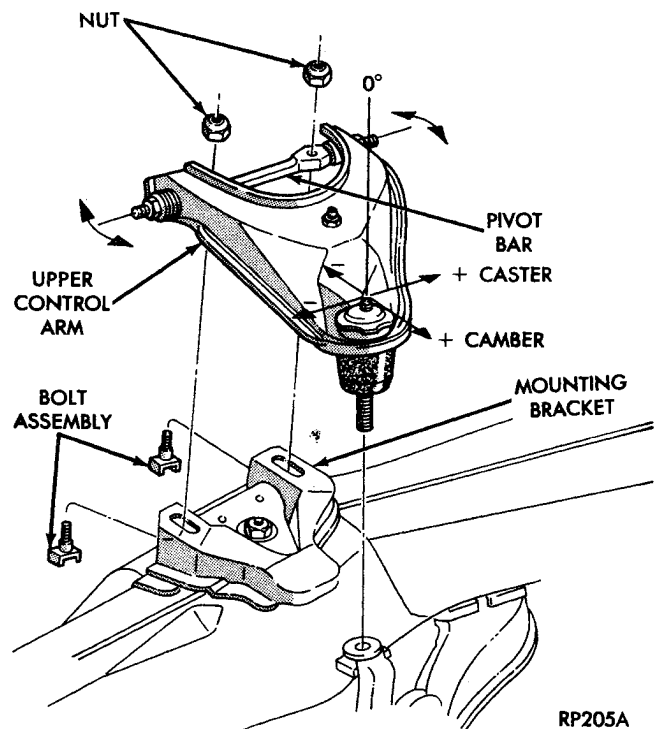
Upper Control Arm Mounting— for Alignment Adjustment (Two-Wheel-Drive Shown)
